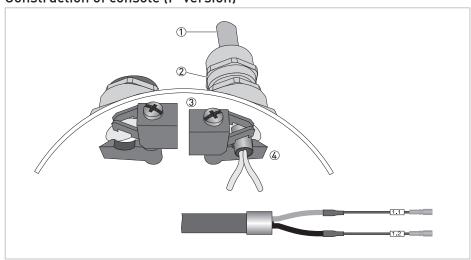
Inserting cable and secure with clamp on shielding bush
